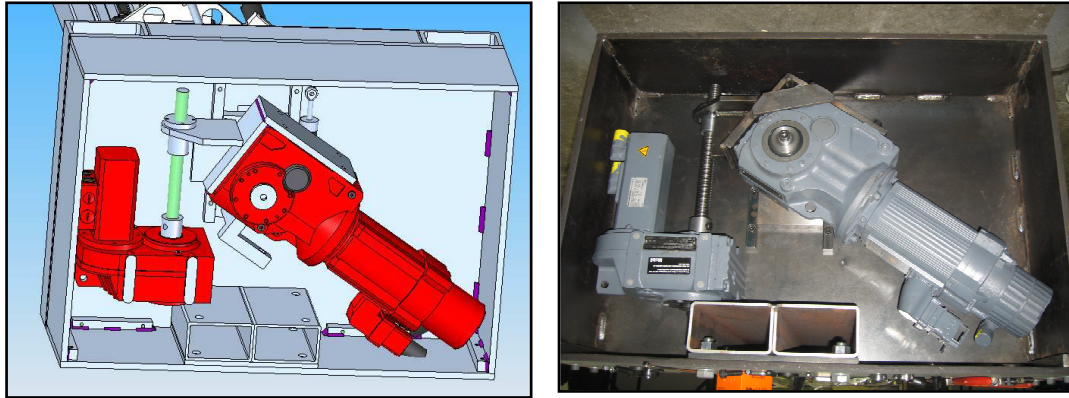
General Arrangement of the base assembly viewed from below – model and as built.
